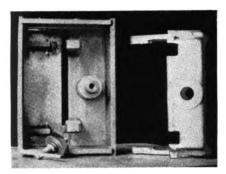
Interior of Jig Shown in Fig. 3, Showing that Smooth Surfaces are Obtained without Machining
